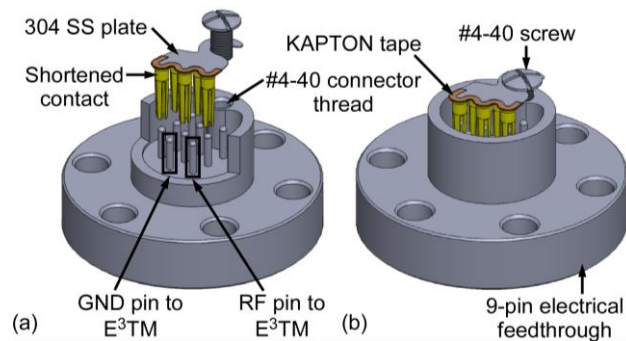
Grounding fixture on 9-pin electrical feedthrough that supports the E³TM. (a) Explosive view with partially cropped feedthrough flange. (b) Grounding fixture assembled to the feedthrough.
